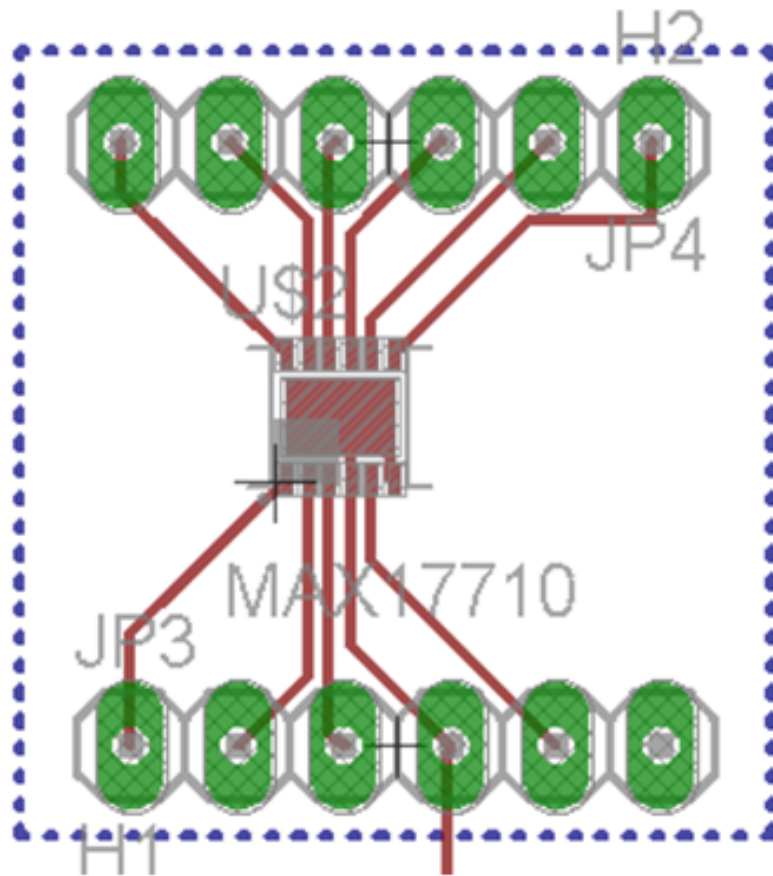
Breakout circuit designed for the MAX17710 in Eagle PCB Design.
